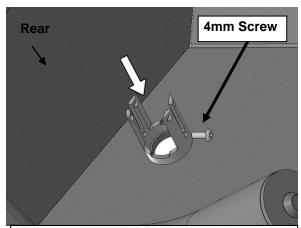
Attach spare tire access lock, license plate lights and wiring harness to Bumper. Plug harness into sensors if equipped
